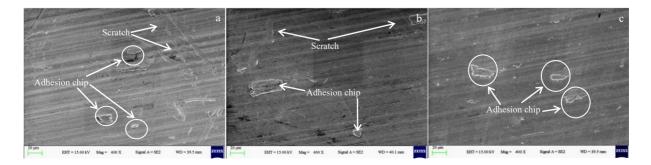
Surface morphologies of workpieces under dry cutting (a), canola oil (b), and canola oil+graphene (c) conditions
